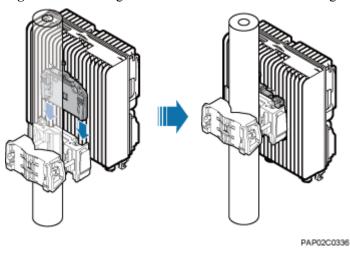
Installing the BTS3902E on the main mounting bracket
